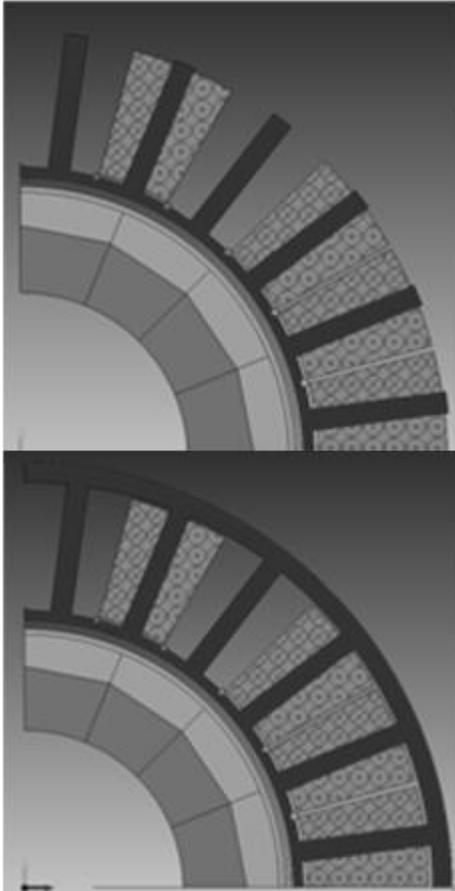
Fully closed slot design. Before (upper) and after (lower) back iron slotted over machine
